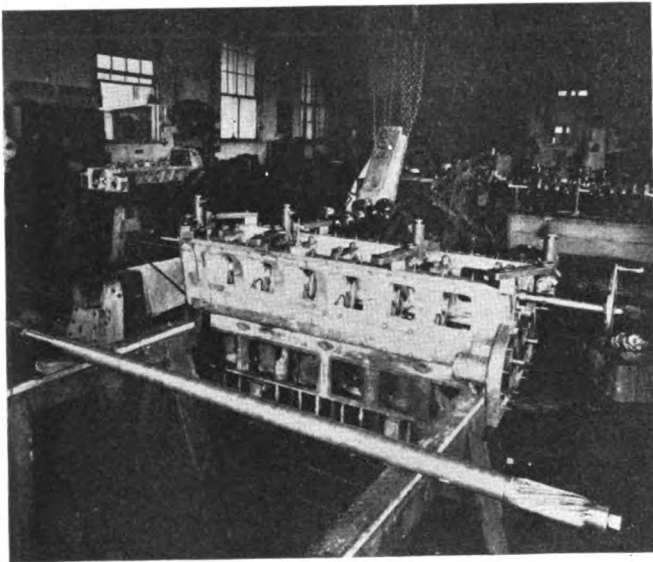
Engine set up for boring the crank-shaft bearing seats
